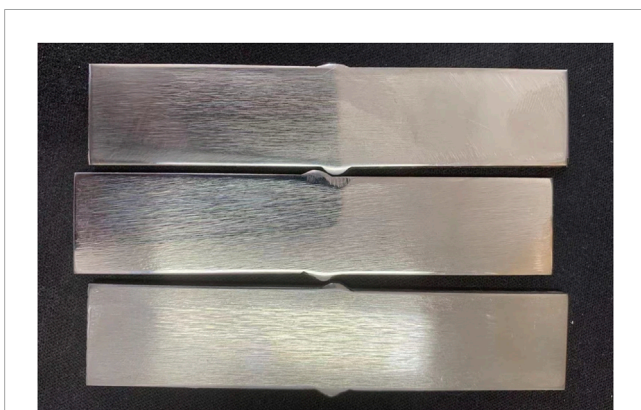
17-7PH stainless steel welded joint specimens.
